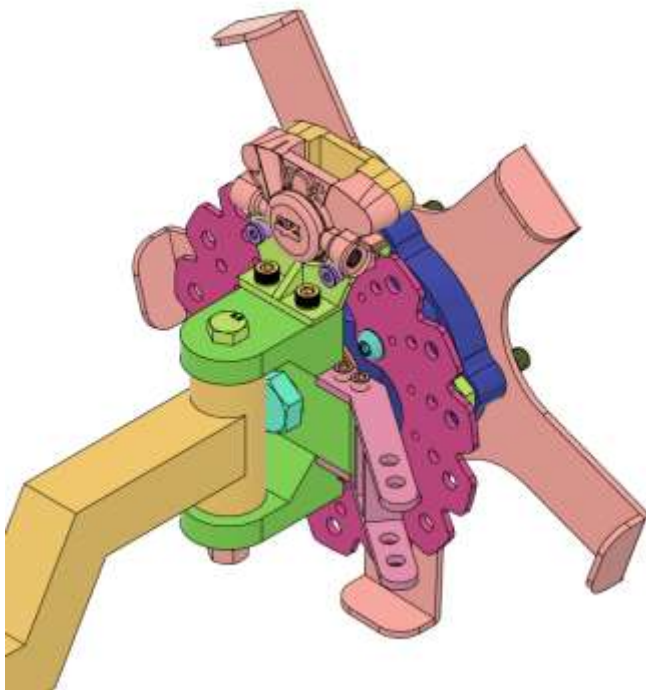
KNUCKLE WITH FULL WHEEL ASSEMBLY
